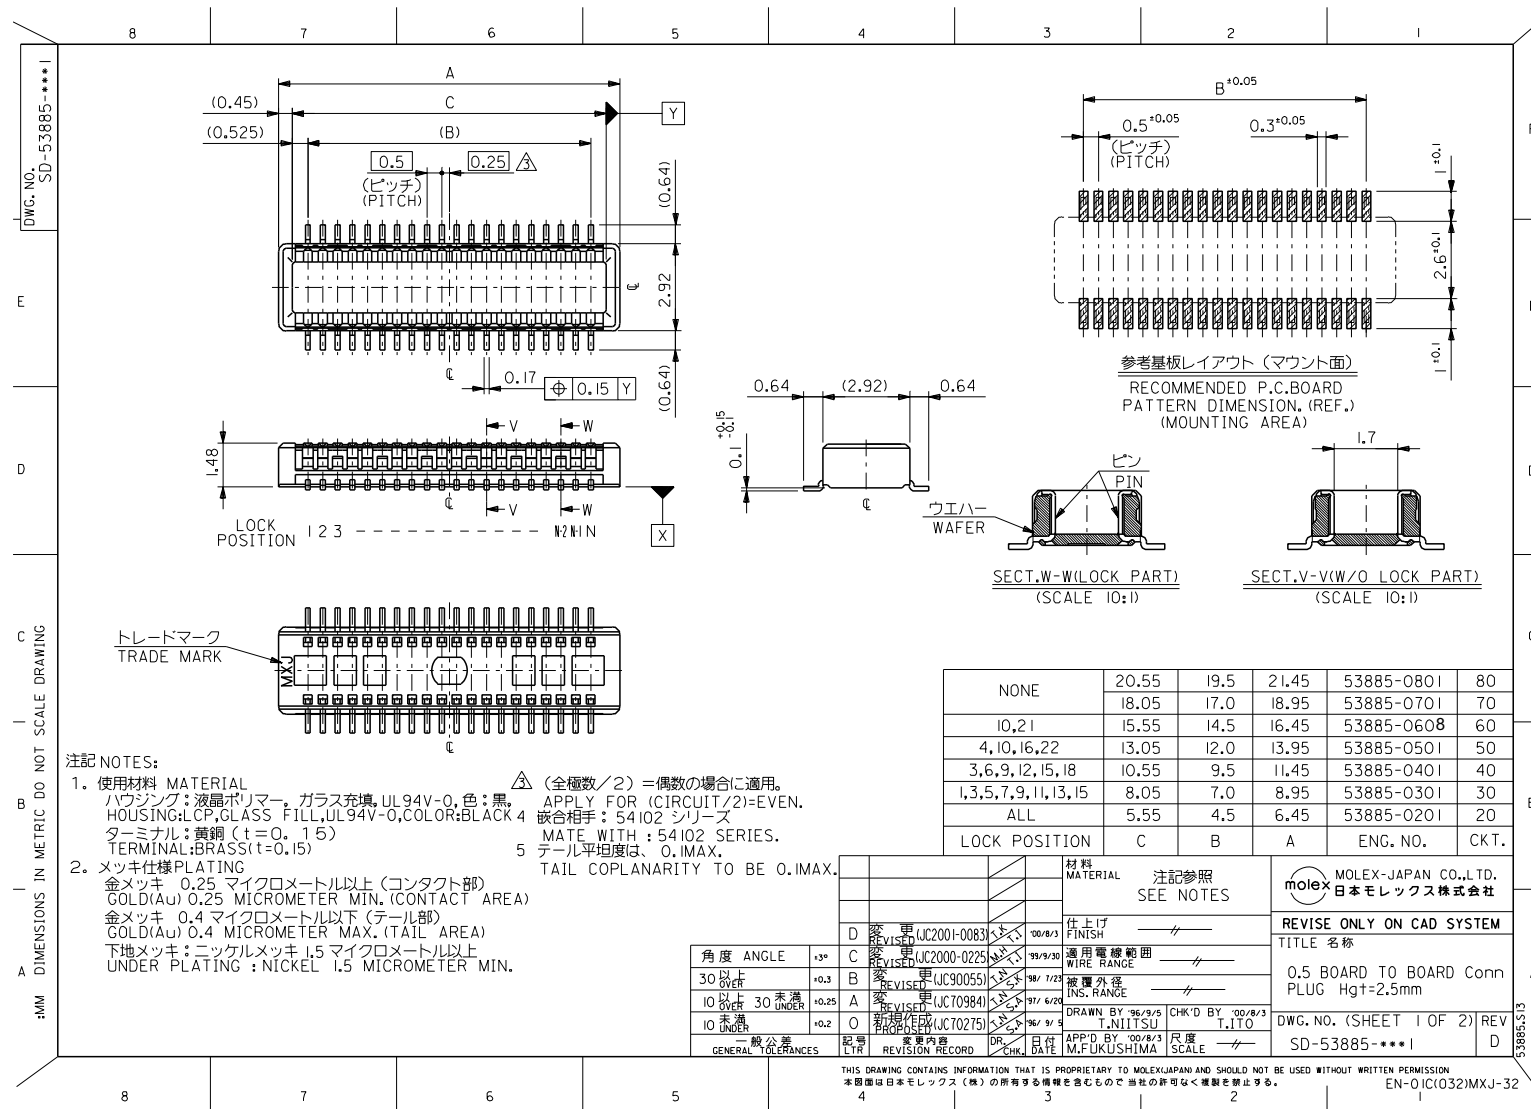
Mechanical dimensions of Molex 53885-0608 connector on application
